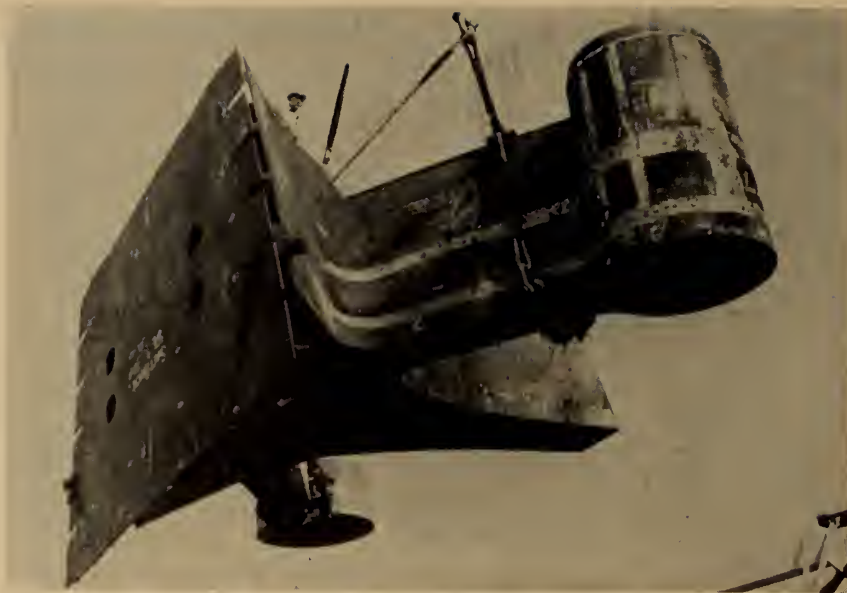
Welded fabricated stern unit with shaft brackets carrying 42,000 shaft hp. Weight, 46 tons.
